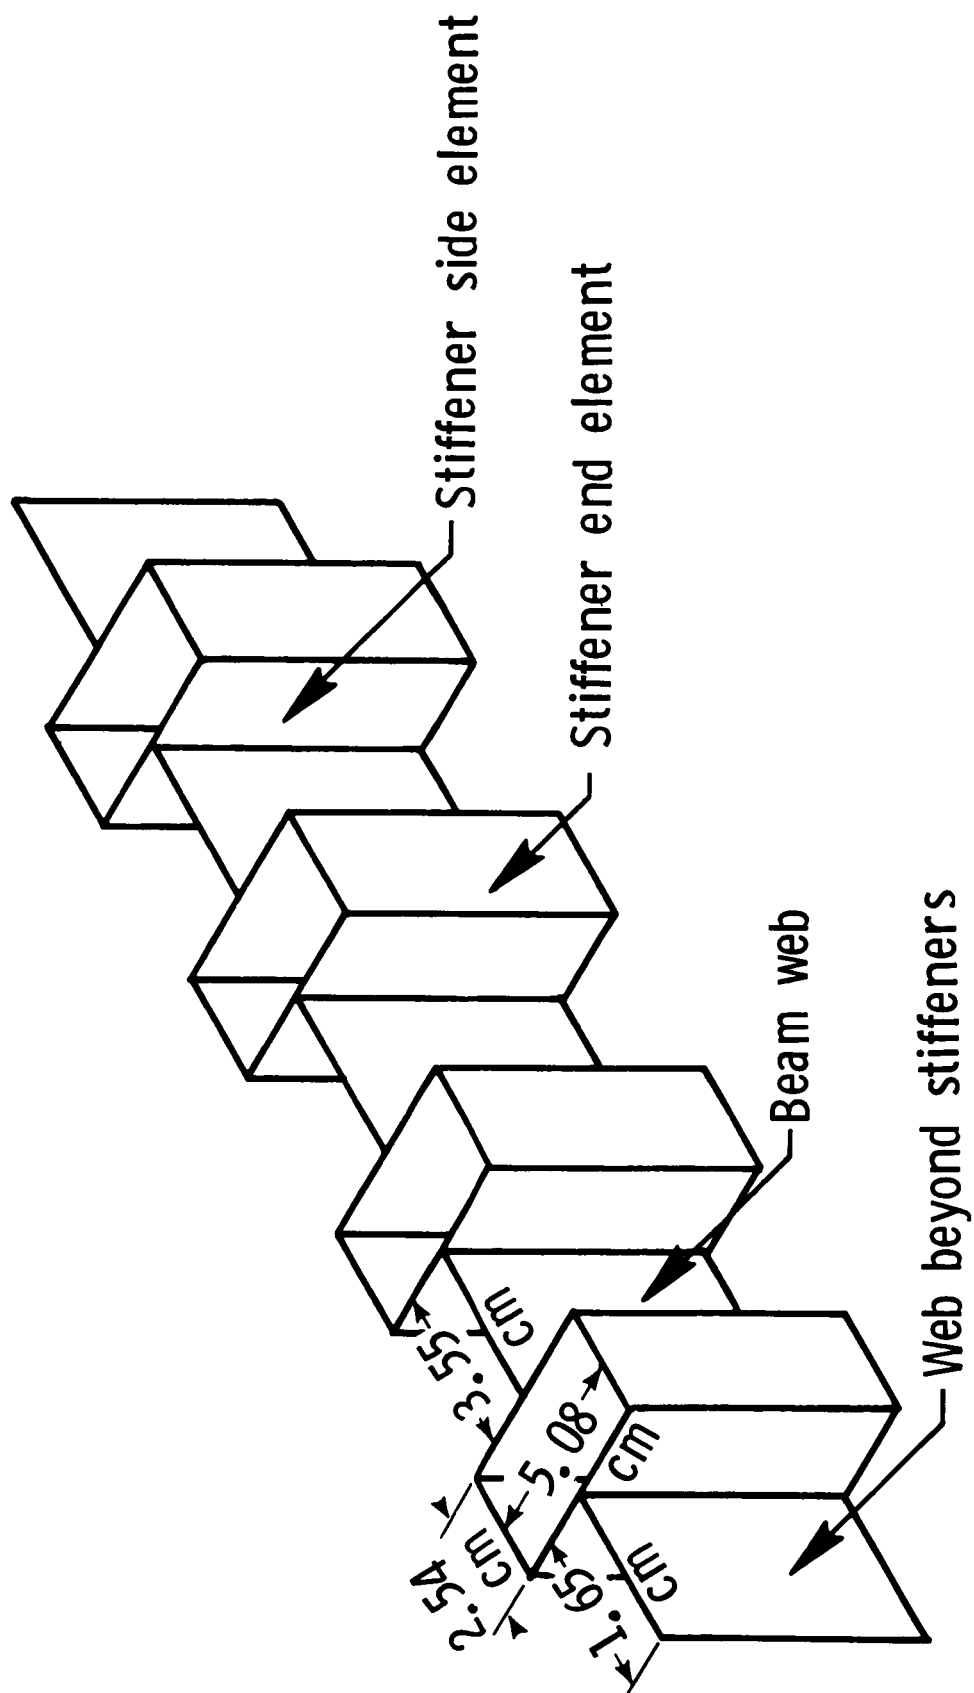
Sketch of four stiffener rectangular cross-section tube stiffened beam.
